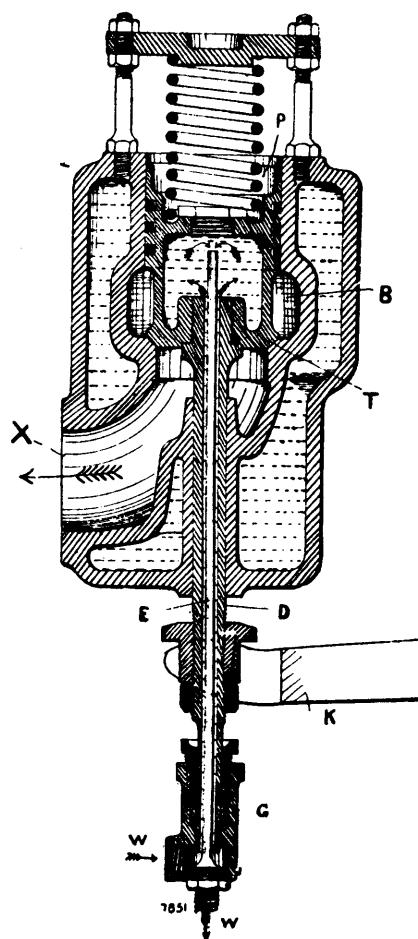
COMMON TYPE OF BALANCED EXHAUST WATER COOLED POPPET VALVE.
